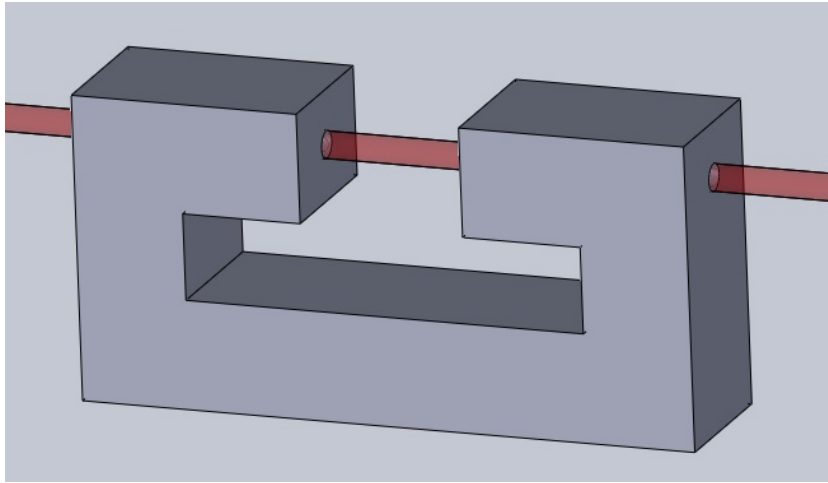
Ferrite core CAD rendering illustrating optical beam passing through core.
